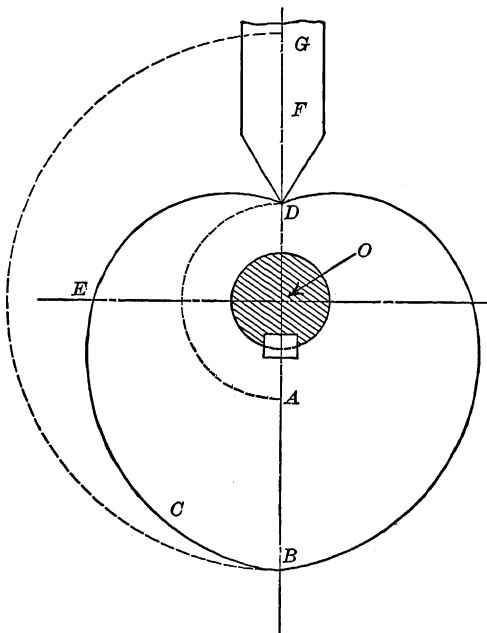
HEART CAM AND FOLLOWER, SLIDING CONTACT
